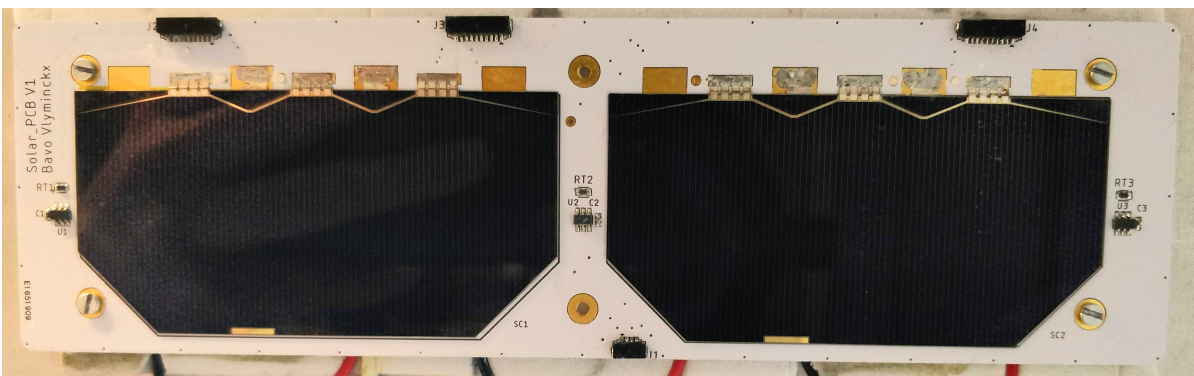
The fully assembled Solar Cell PCB, which is here bolted to the test set-up.
